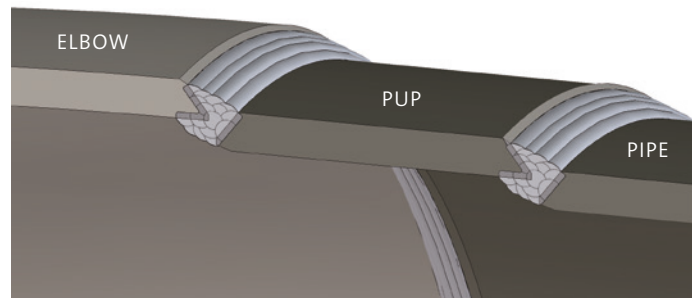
Common practice for adjusting the misalignment between the root face of the pipes and the elbows using pups (small adapter pipes) which enable back welding.
